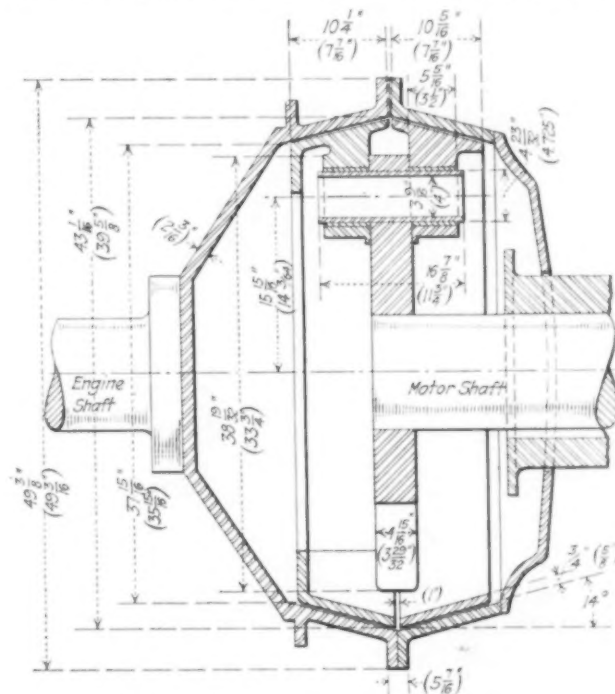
PRINCIPAL DIMENSIONS OF CLUTCHES
